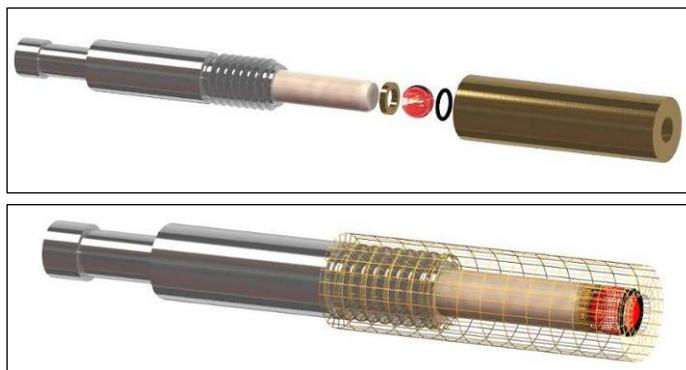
3D model of the fiber contact design. Parts position (up) and assembled (down)
